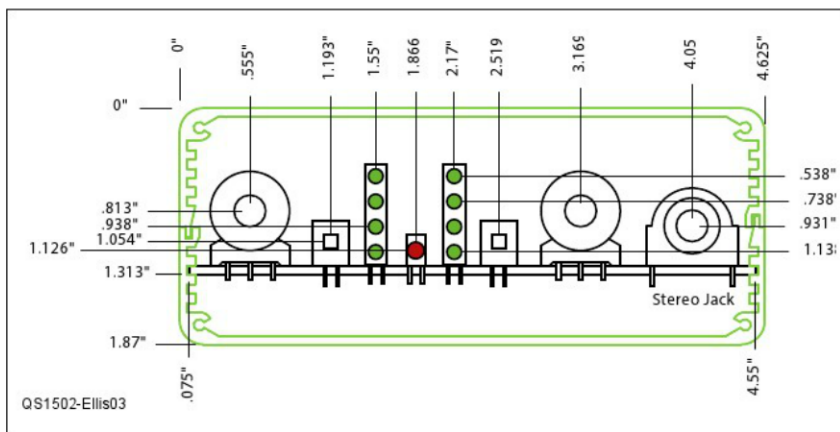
An accurate mechanical drawing is essential for locating front panel openings for external components that mount to a printed circuit board such as potentiometers, lights, and switches.
